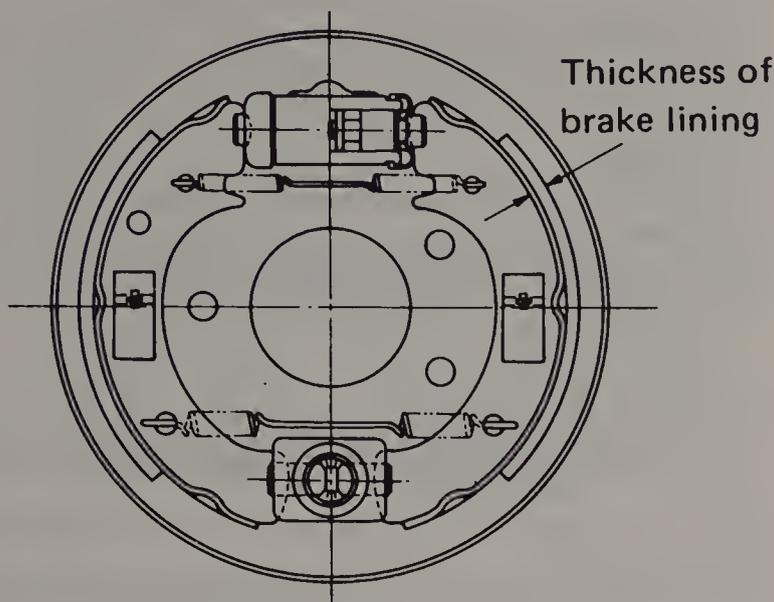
Drum brake shoe thickness measurement (Sec 32)
